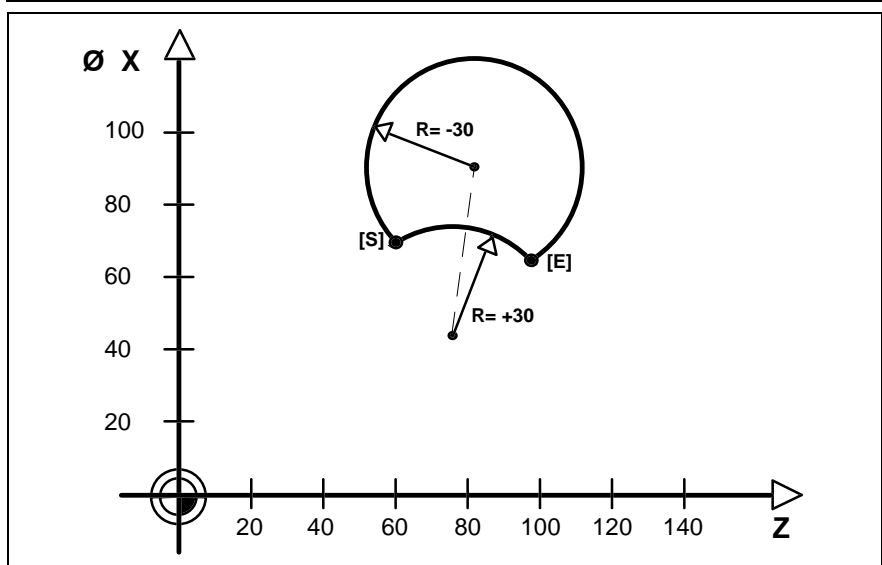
Circle radius programming, determining the sign to be used for the radius
